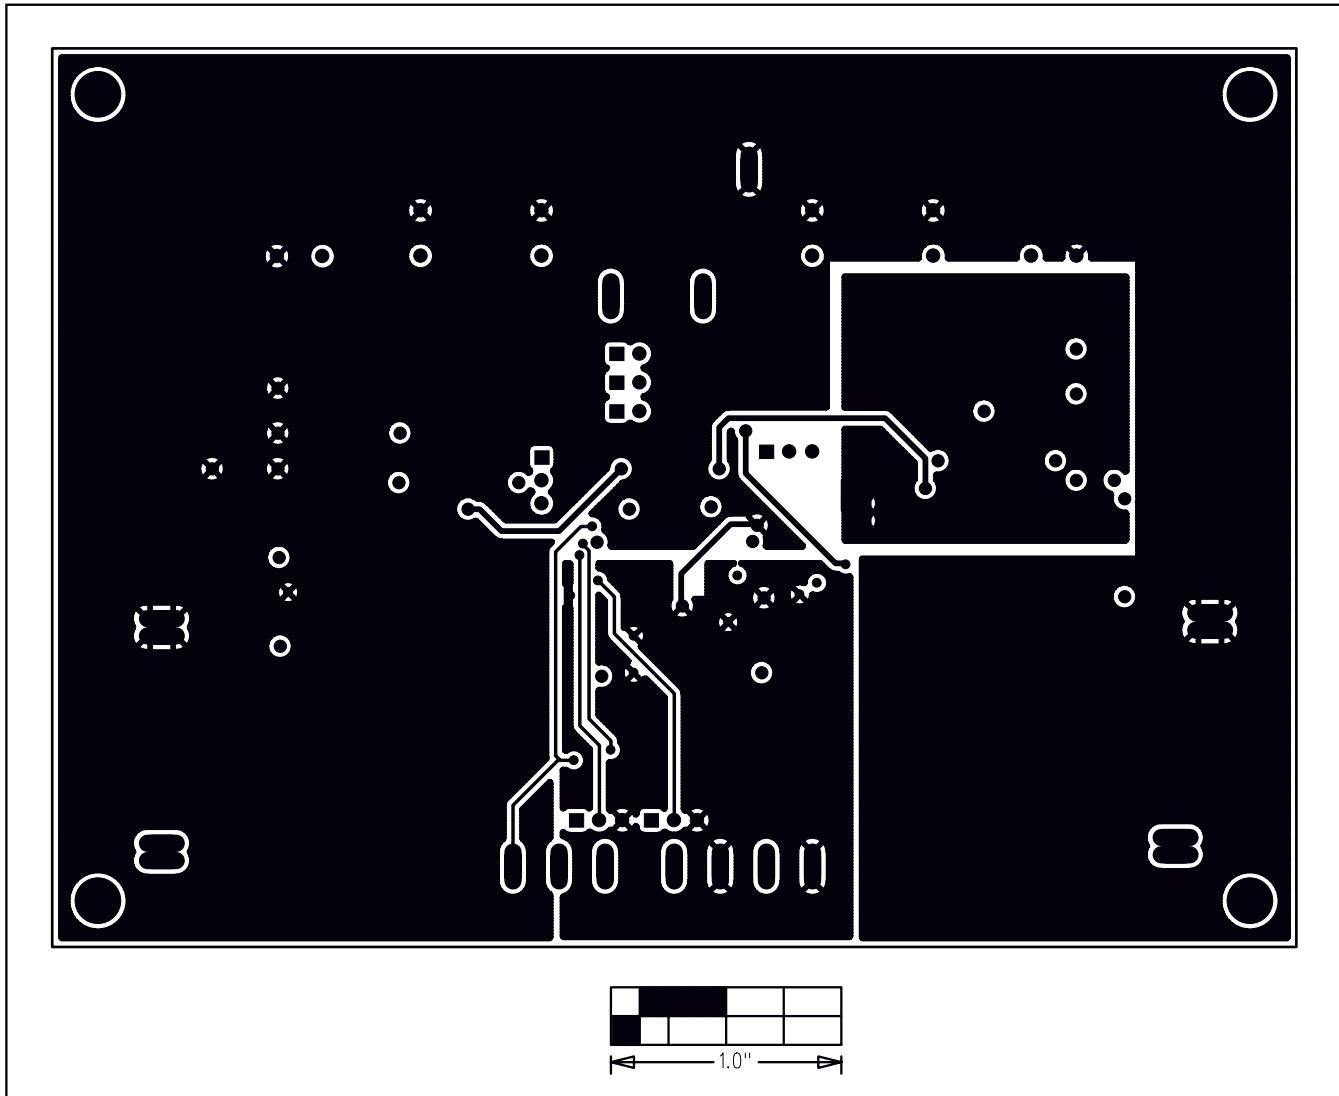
MAX8537 EV Kit PC Board Layout—PGND Layer
